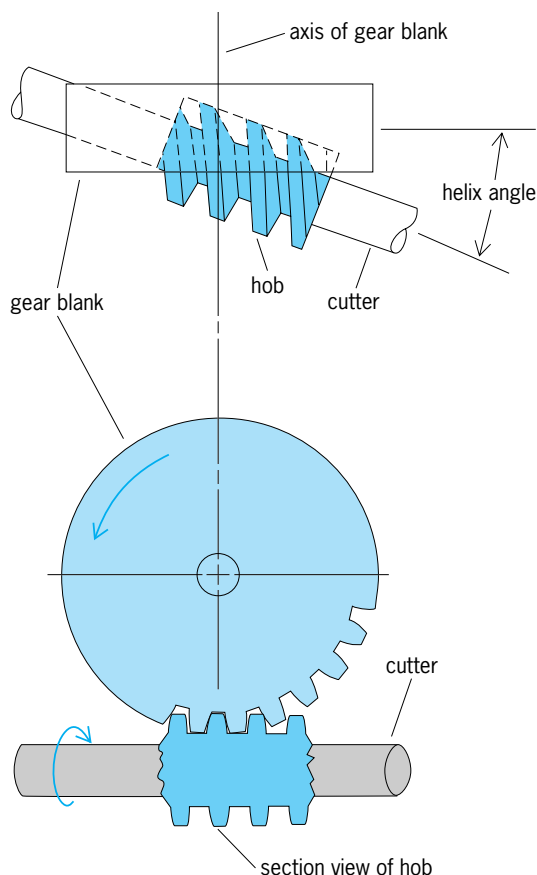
Gear hobbing operation; rotation of the hob and gear blank is synchronized and continuous. (After J. G. Bralla, ed., *Handbook of Product Design for Manufacturing*, McGraw-Hill, 1986)
